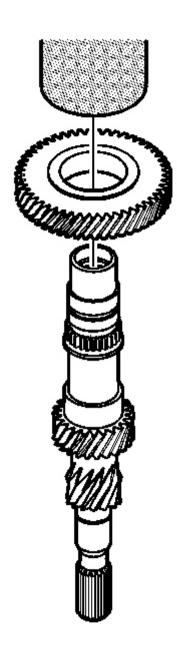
Input Shaft Assemble & Components Courtesy of GENERAL MOTORS CORP.
